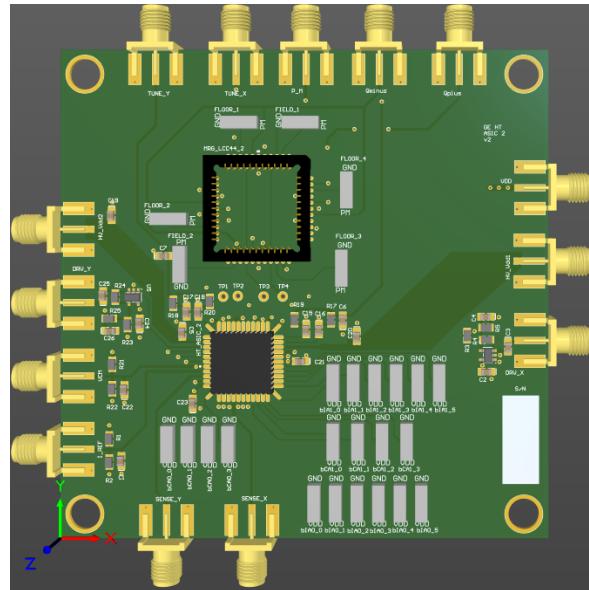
Test board for HT ASIC packaged in ceramic LCC48
